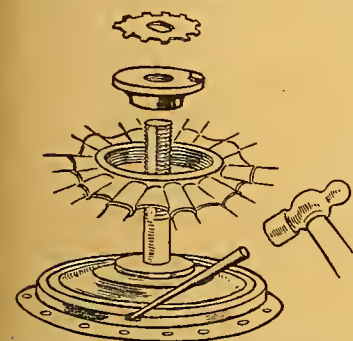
Method of removing hub end ring. Remember it is a left-handed thread.
